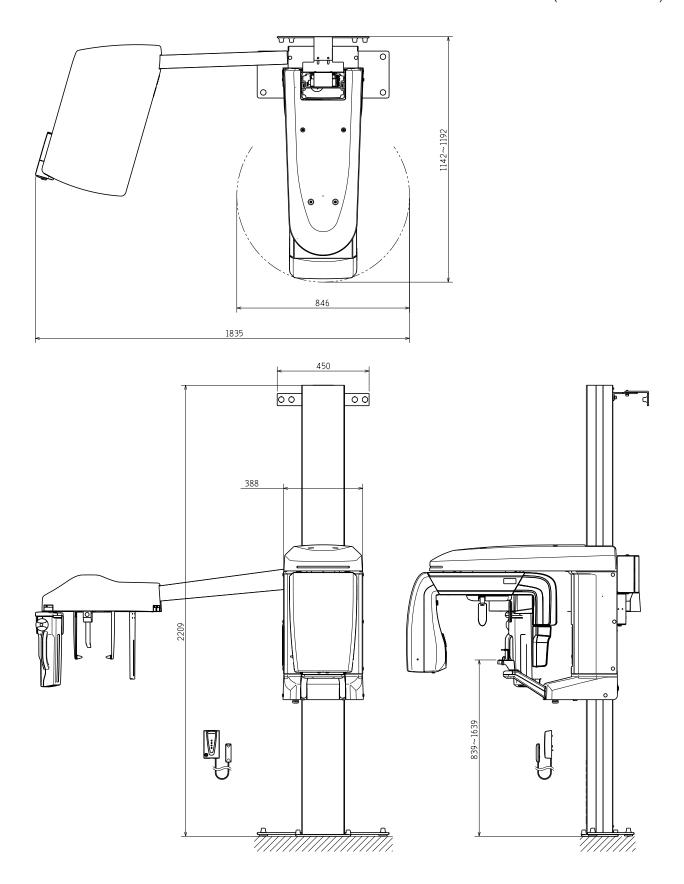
22: Standing position wall-mount: 3D Cephalometric type
